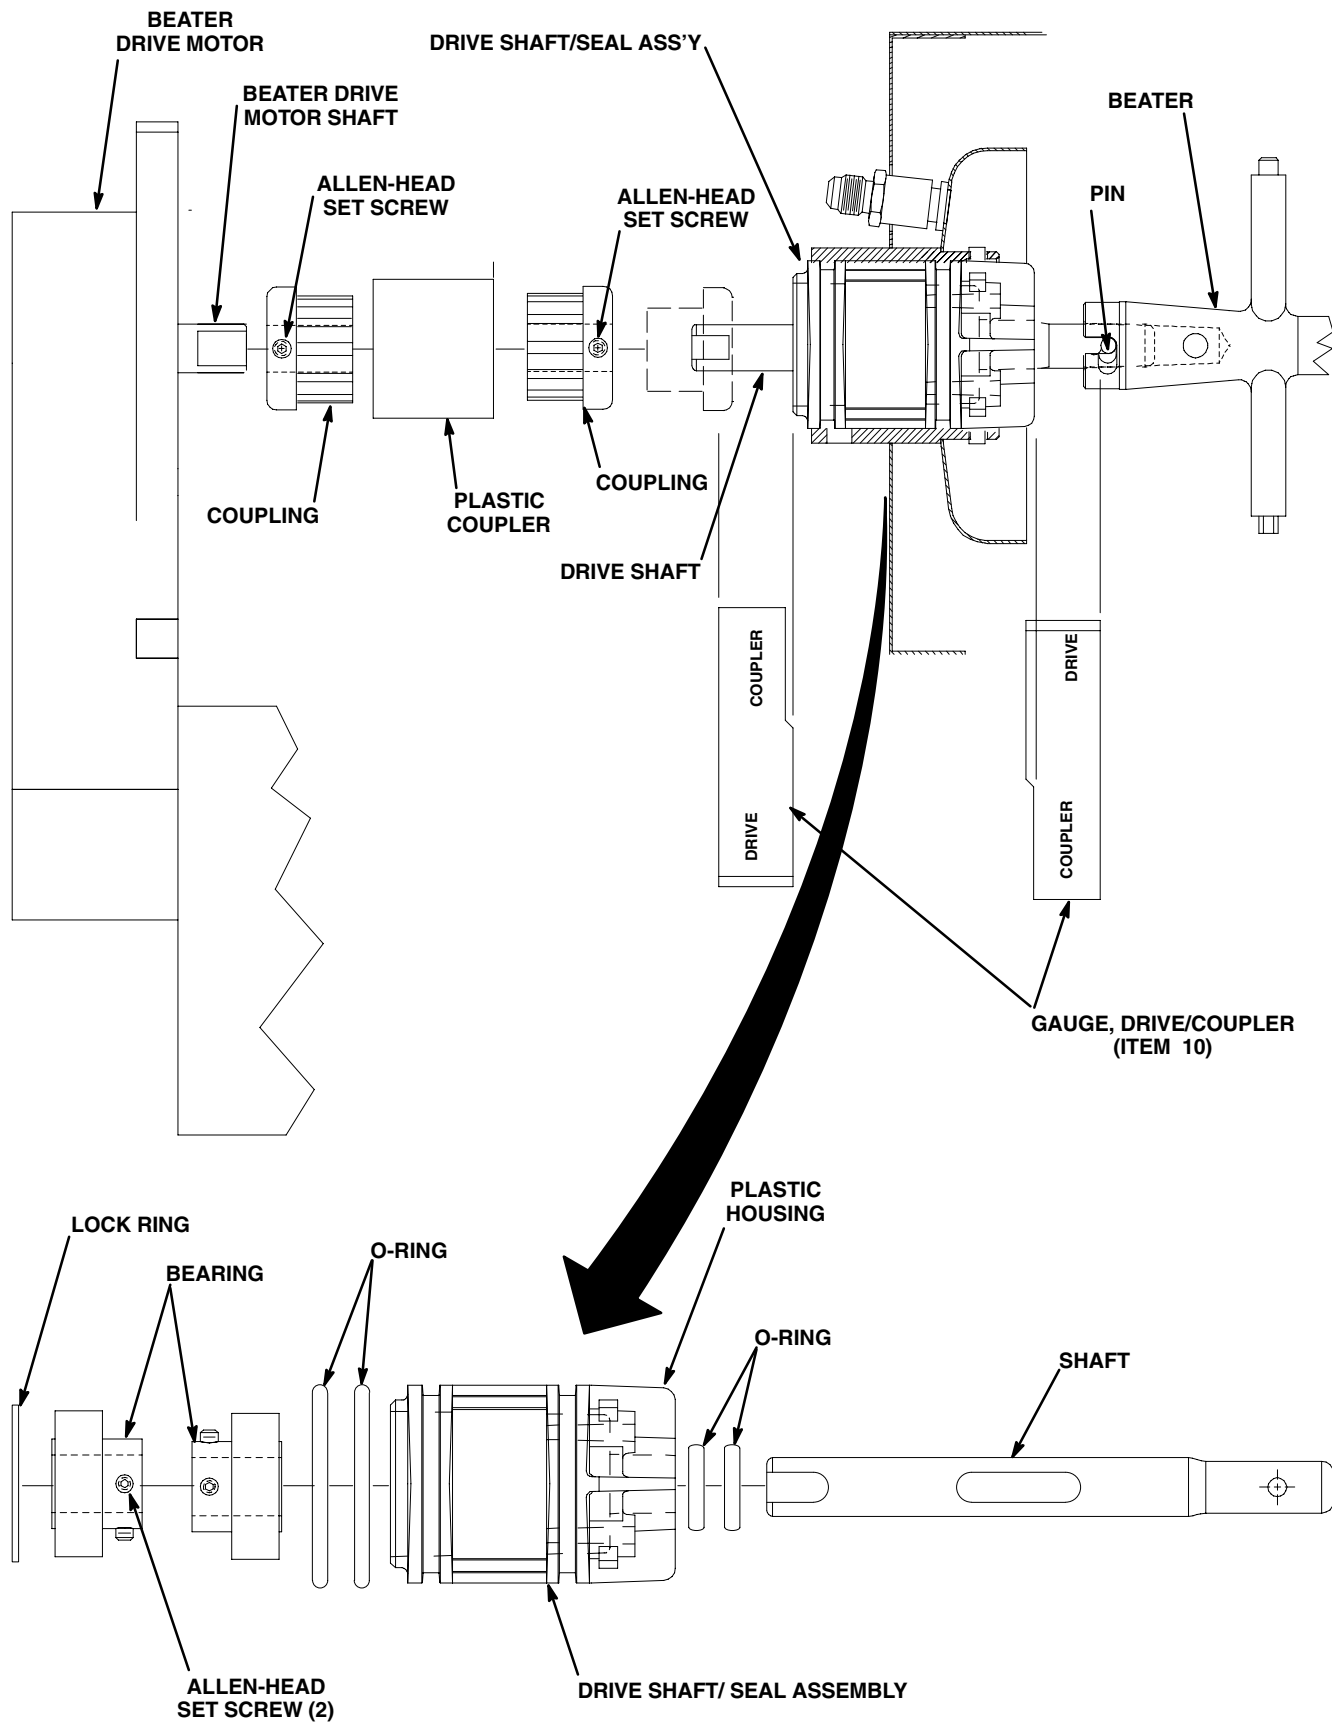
SERVICING BEATER MOTOR DRIVE SHAFT/SEAL ASSEMBLY
